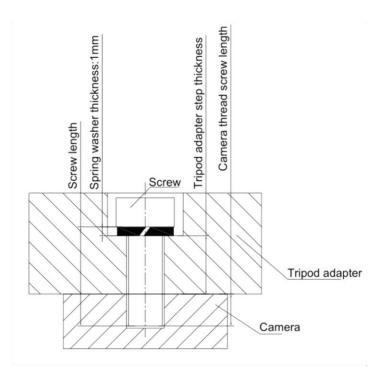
Schematic diagram of screw specification, tripod adapter step thickness and spring washer thickness
